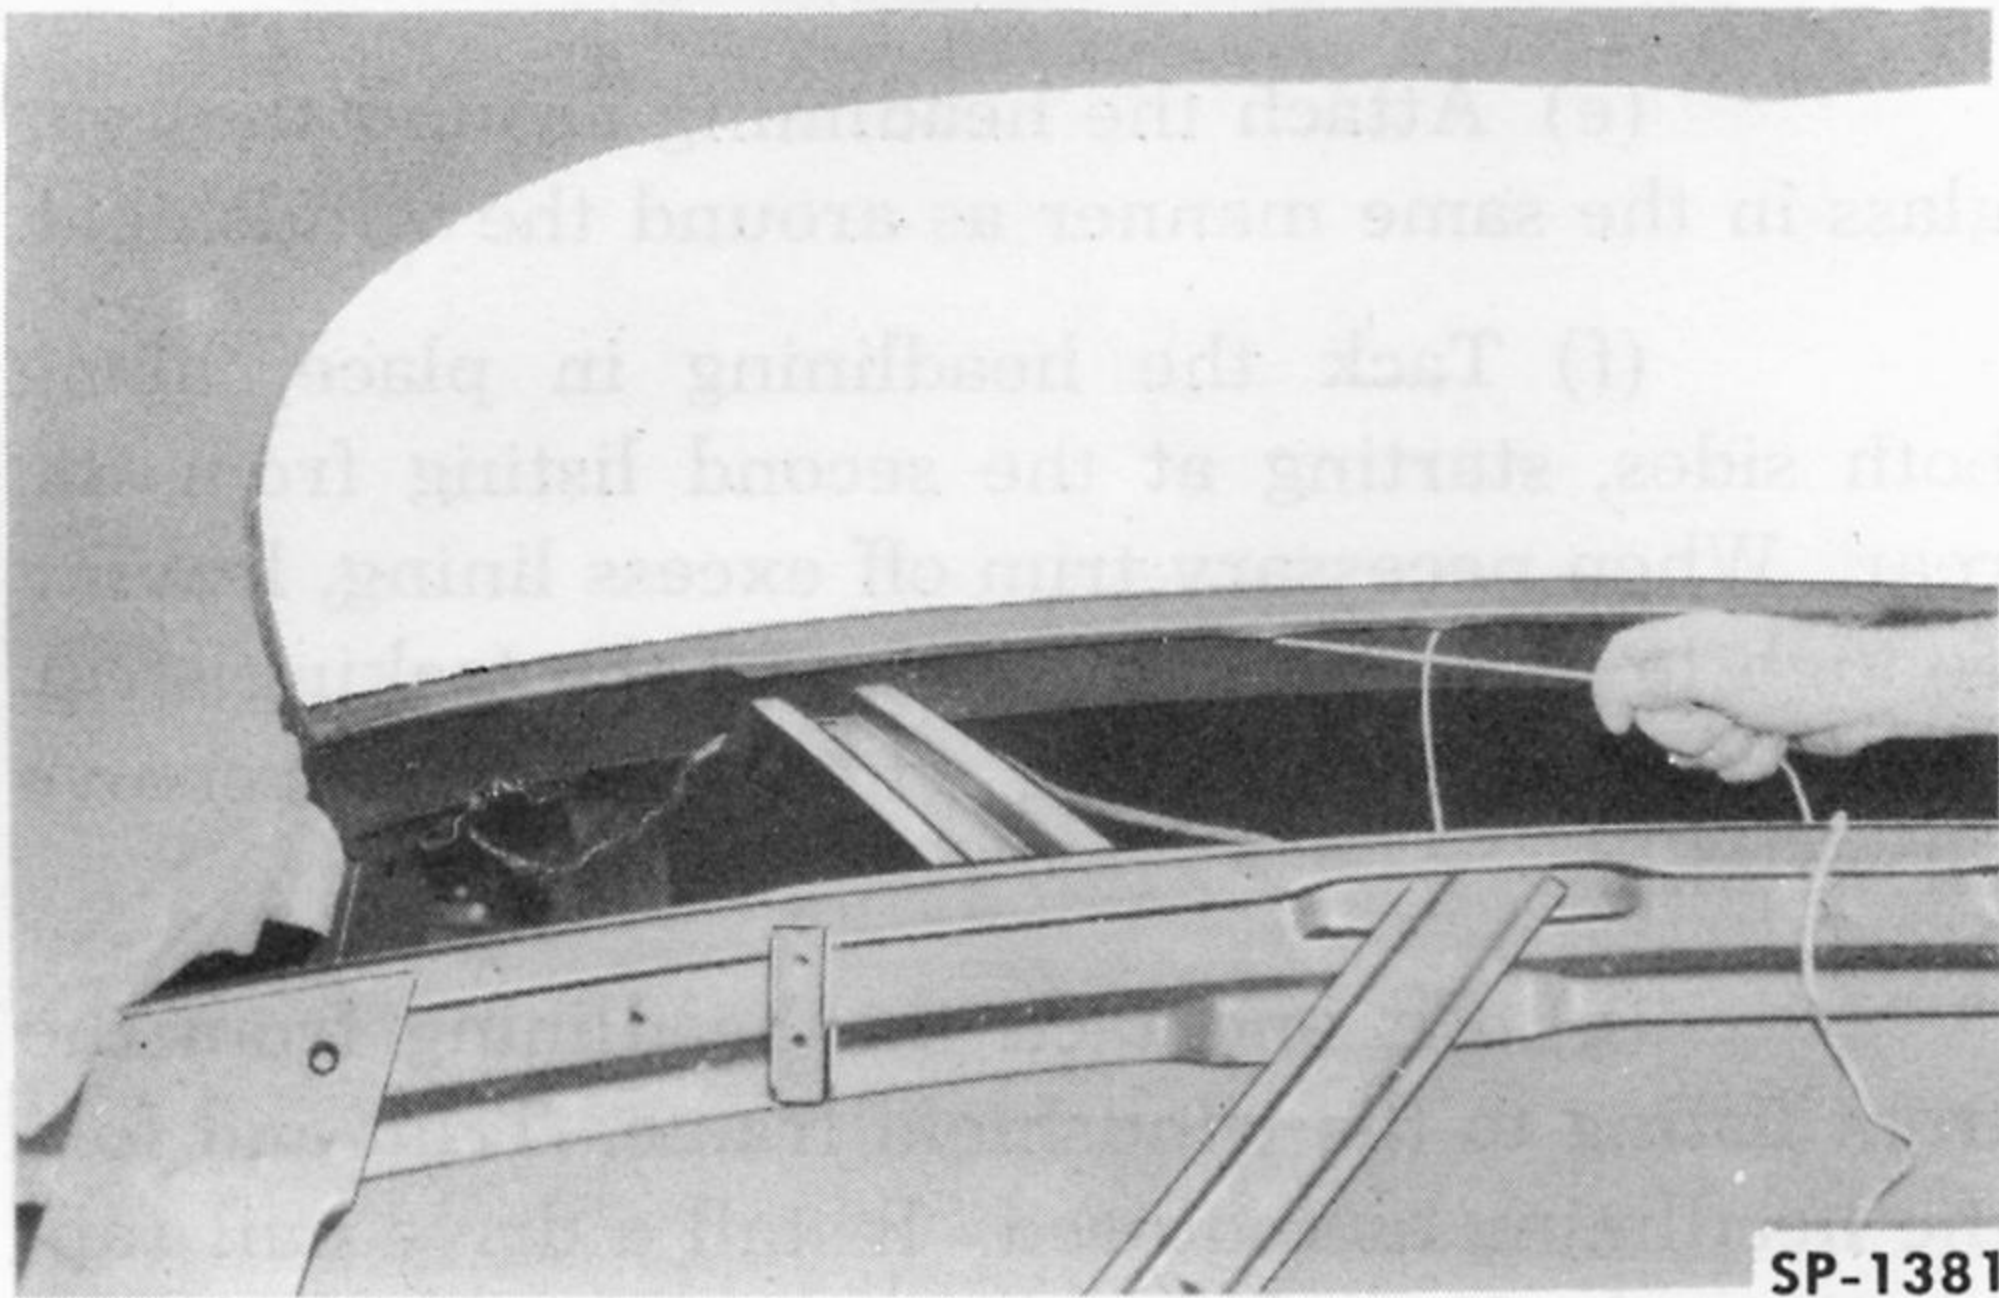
Rear Glass in Place Ready to Install—Kaiser
